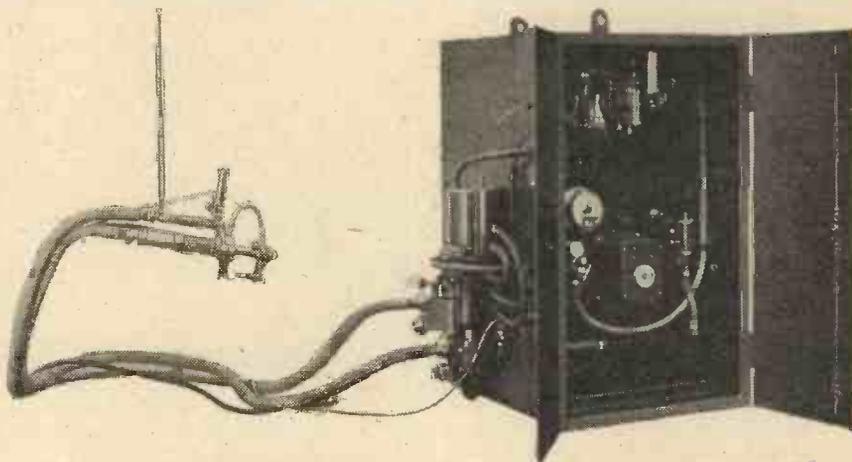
The Sciaky portable electric spot-welding machine largely used for motor chassis and body construction.
